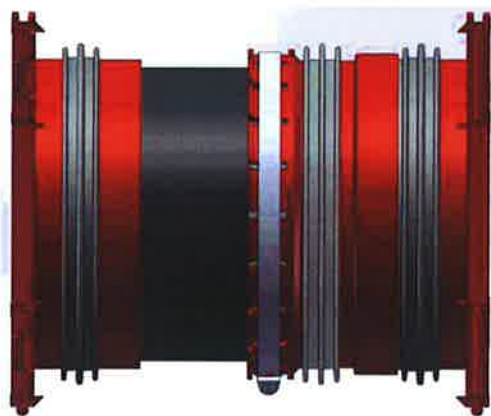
Side view of the cable feed-through - manufacturer's drawing.
